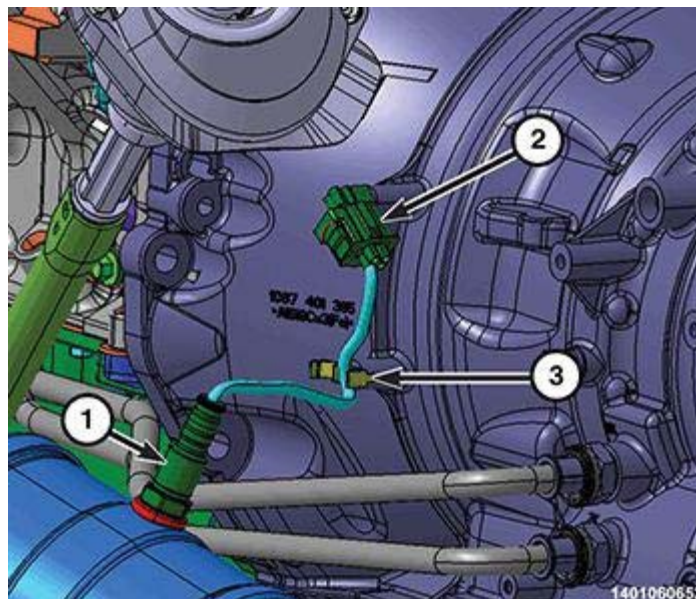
Oxygen Sensor, Oxygen Sensor Wire Harness Connector & Retainer
